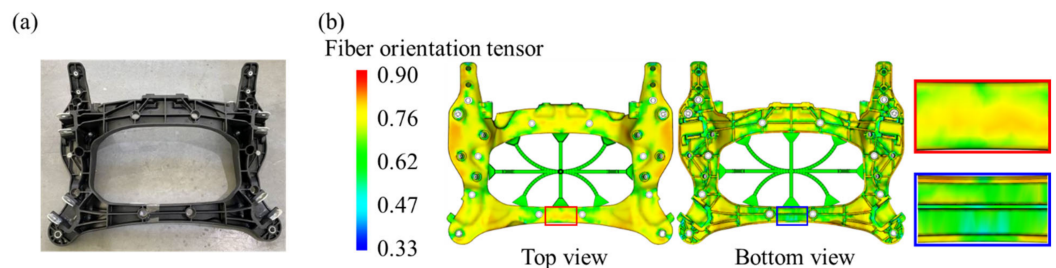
(a) PA6-20CF composite cross-member with aluminum insert fabricated by injection molding (bottom view), (b) fiber orientation distribution result of the cross member and detailed view at the machined location.
